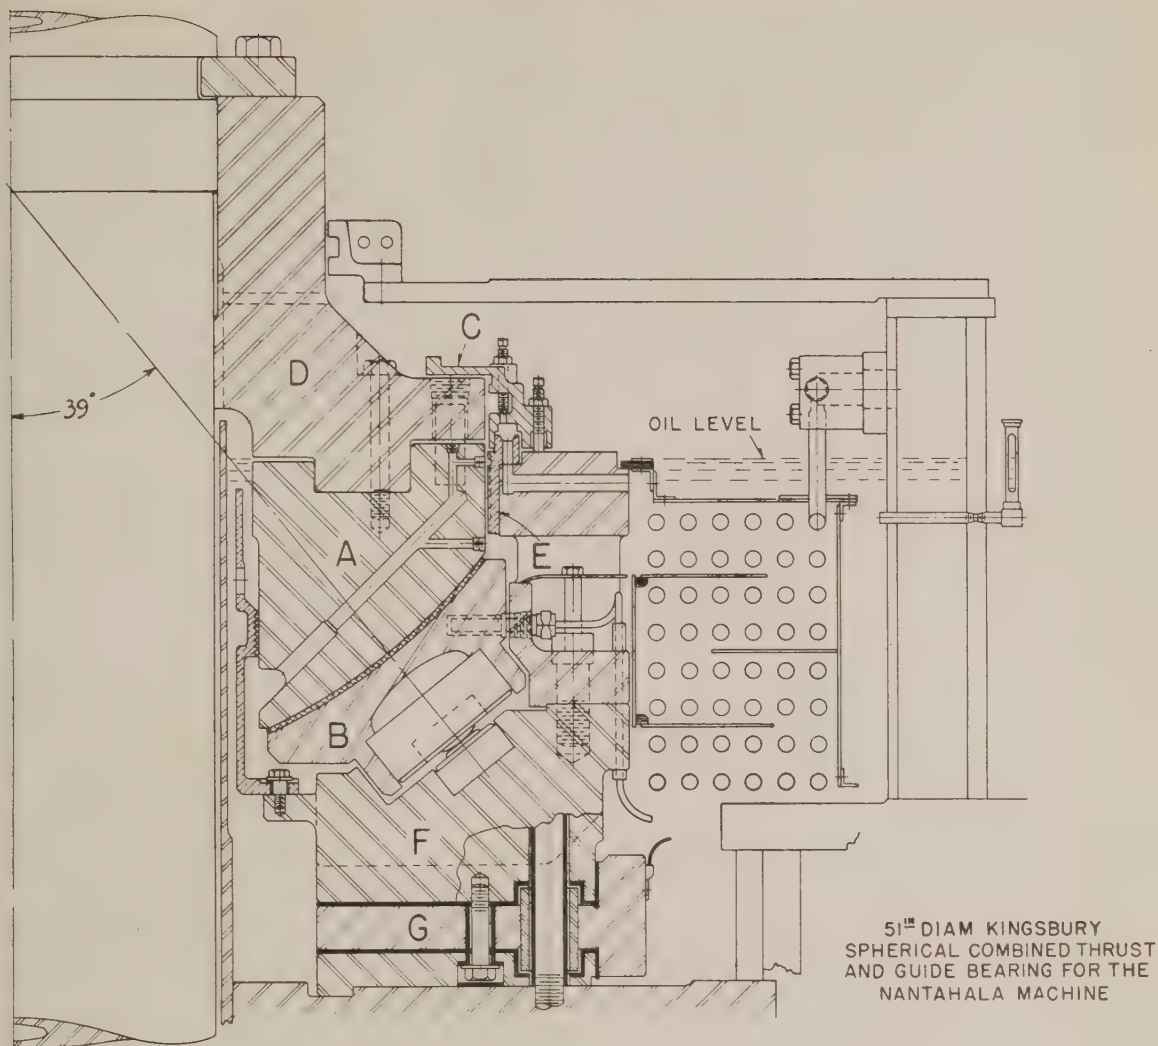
SPHERICAL COMBINED THRUST AND GUIDE BEARING FOR THE NANTAHALA MACHINE; 51 IN. DIAM
